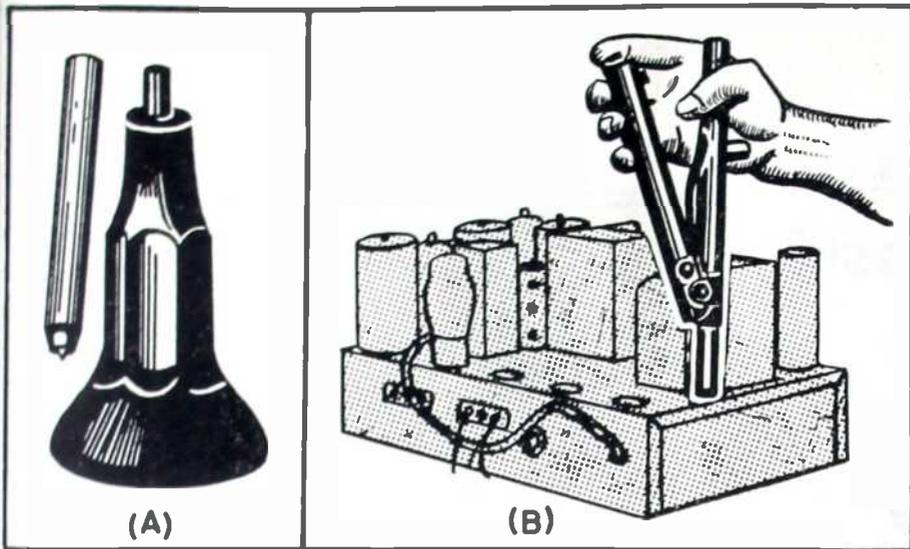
(A): A simple riveting and eyeletting tool. (Courtesy Insuline Corporation of America). At (B): Hand type gun for installing improved rivets on radio equipment. (Courtesy Cherry-Rivet Company)
